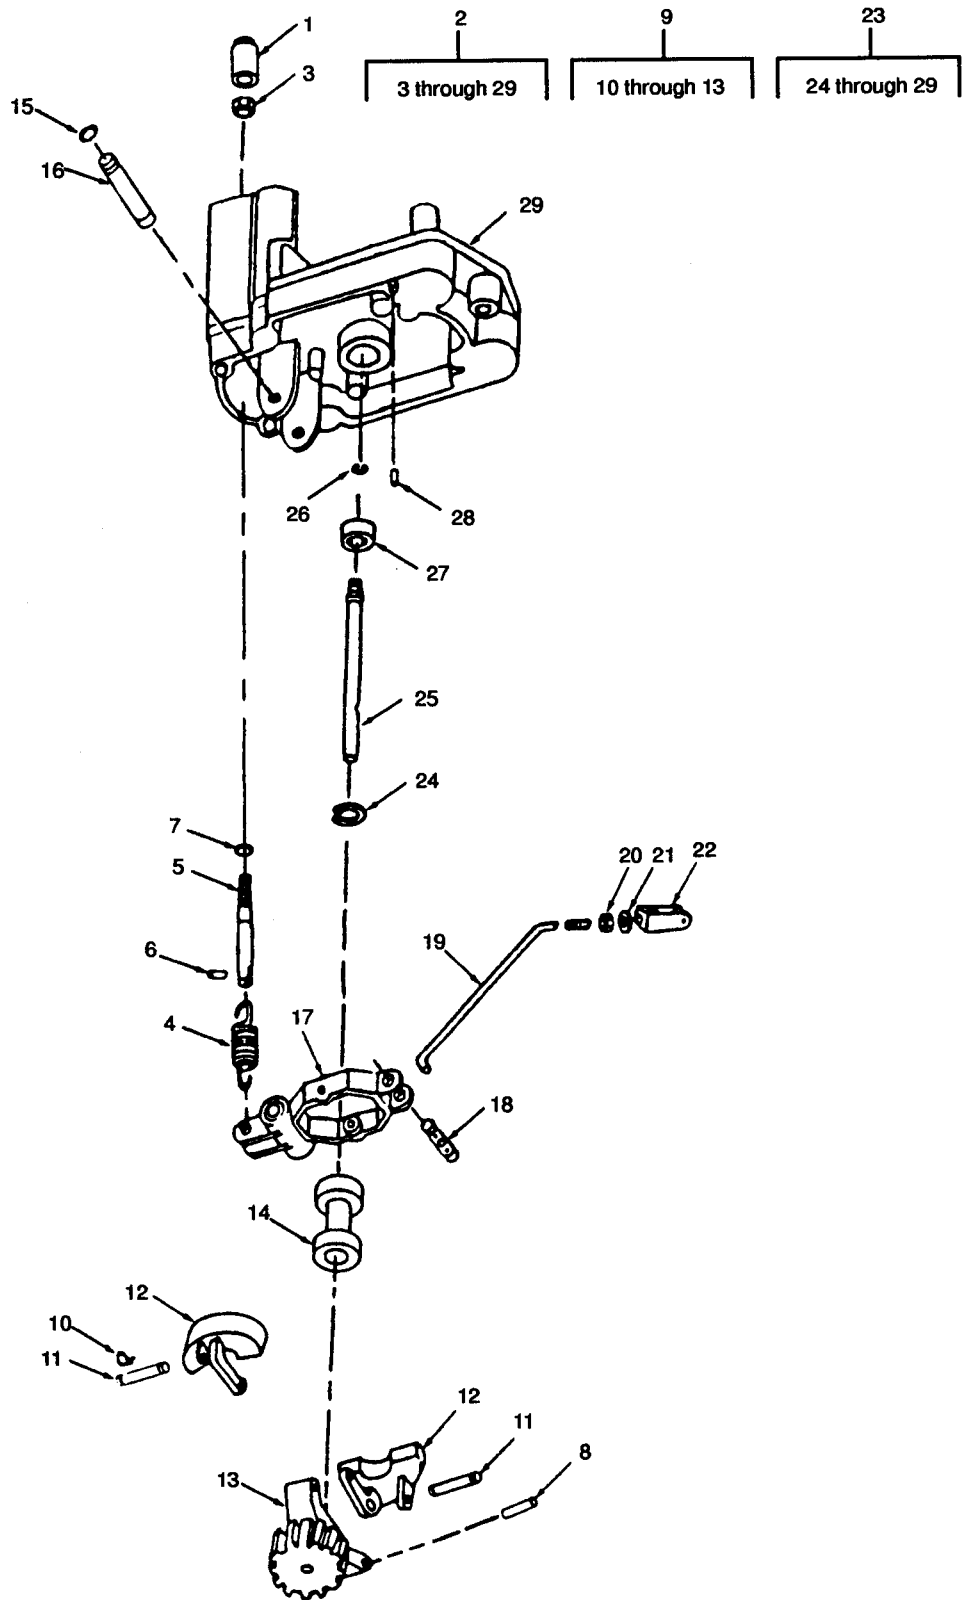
Engine Speed Governor Assembly (with Plastic Gear)
